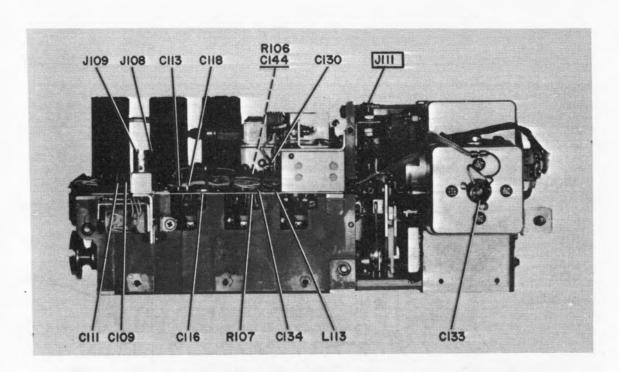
RF and PA Amplifier Assembly, Right Side
